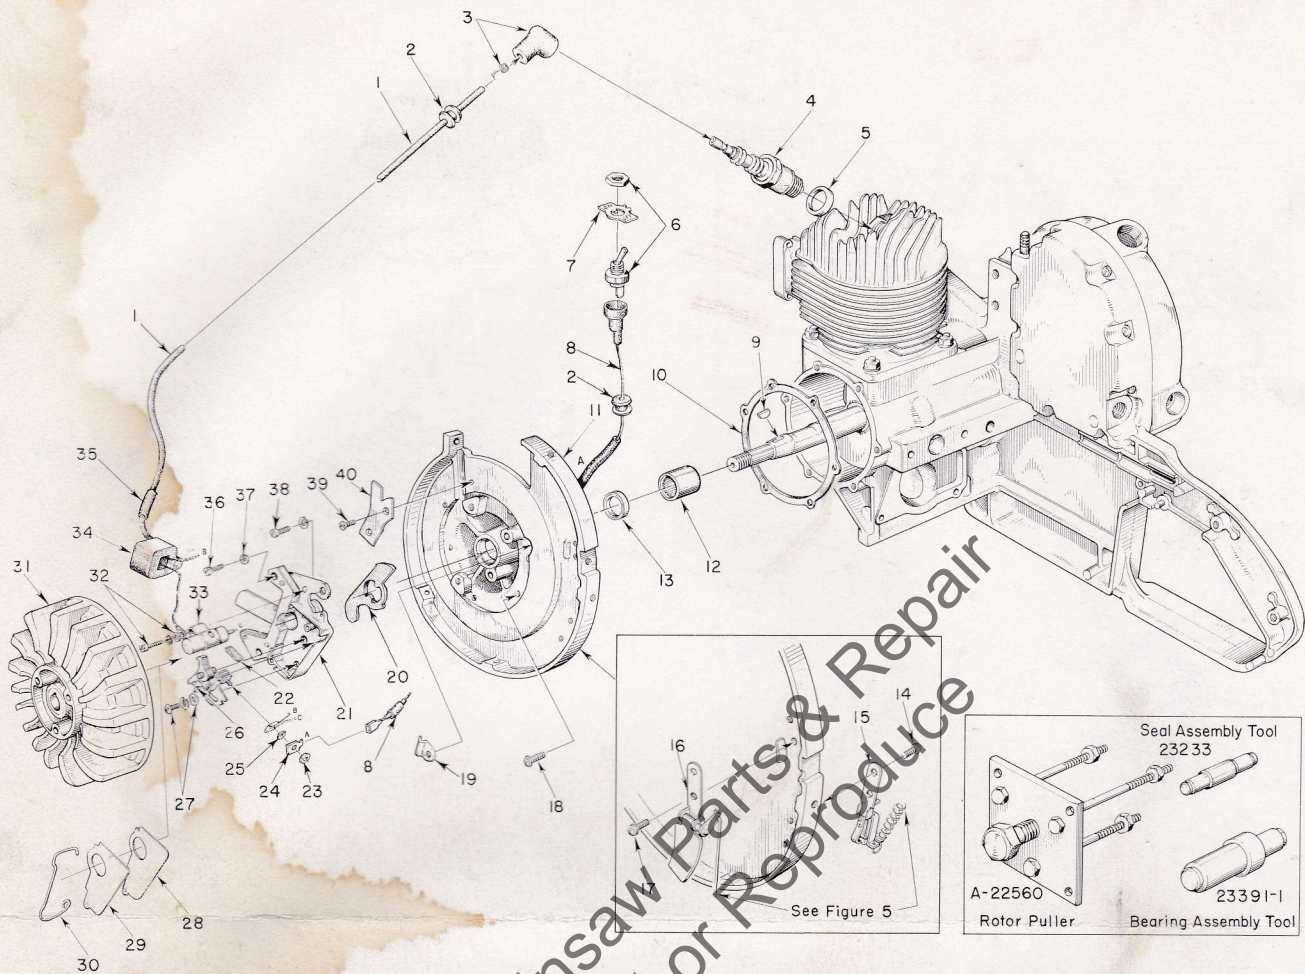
IGNITION AND GOVERNOR PARTS
